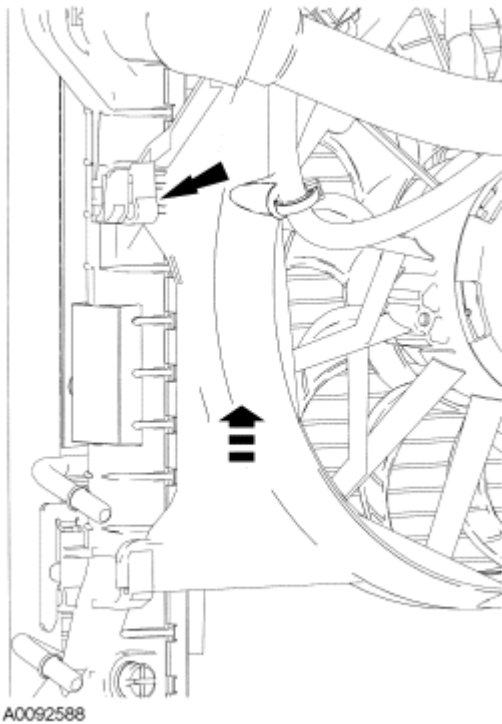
Identifying Top Cooling Fan Retaining Clips Removing Cooling Fan
